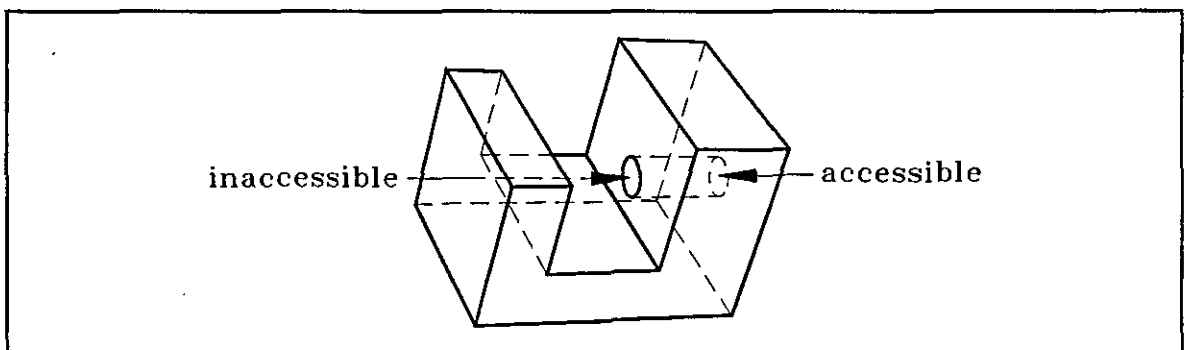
A hole that is not accessible by cutting tool from one end.
